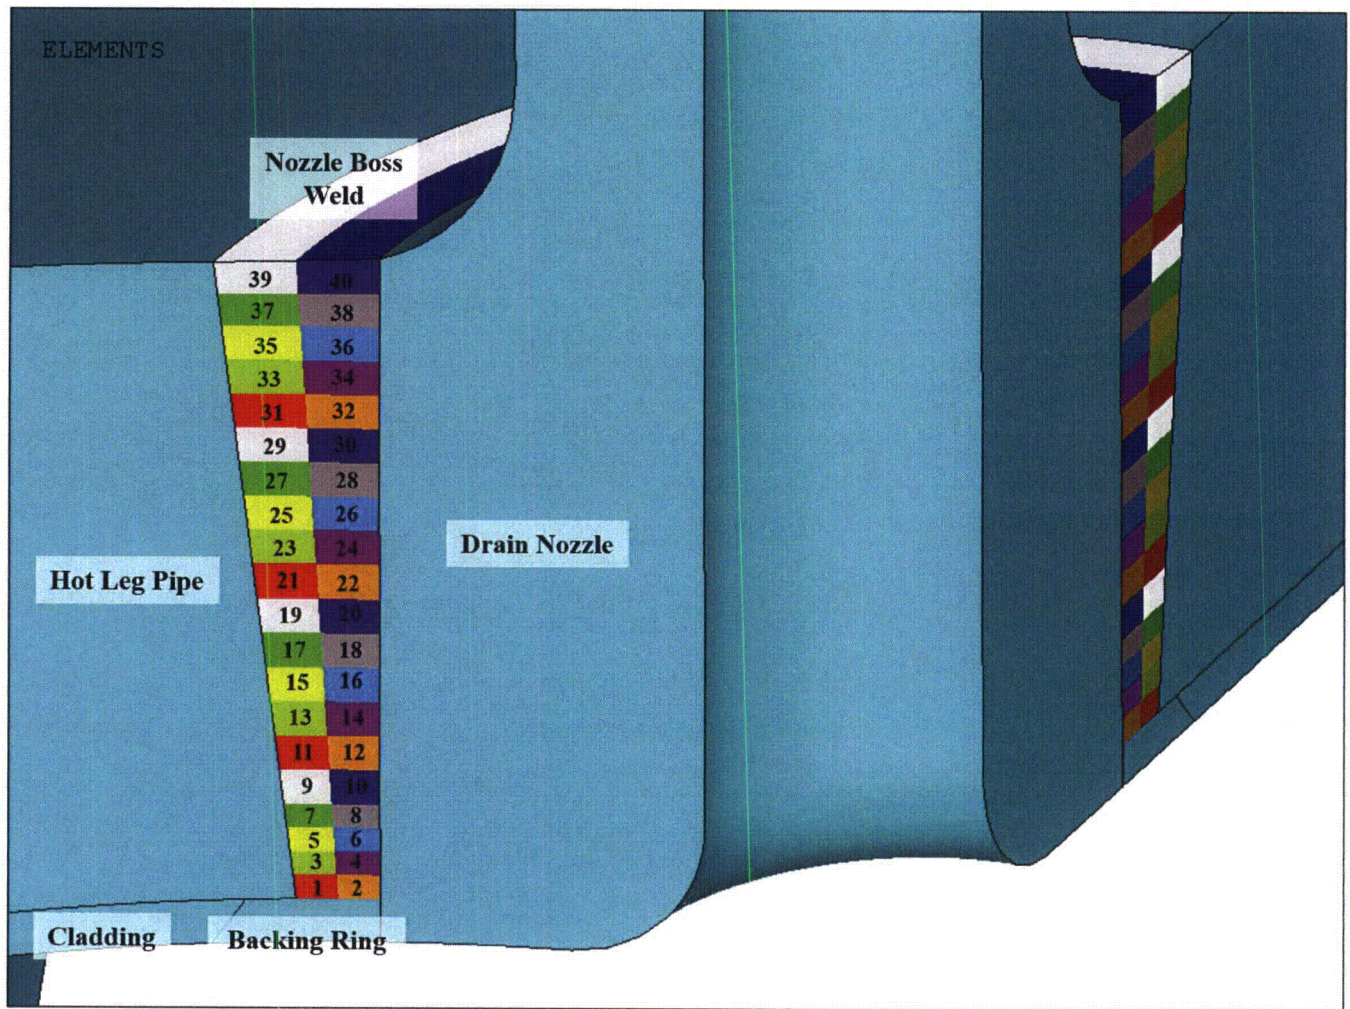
Weld Nugget Definitions for the Boss Weld
